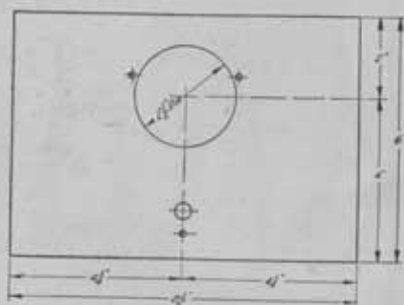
THE DRILLING PLAN FOR PANEL 11.
